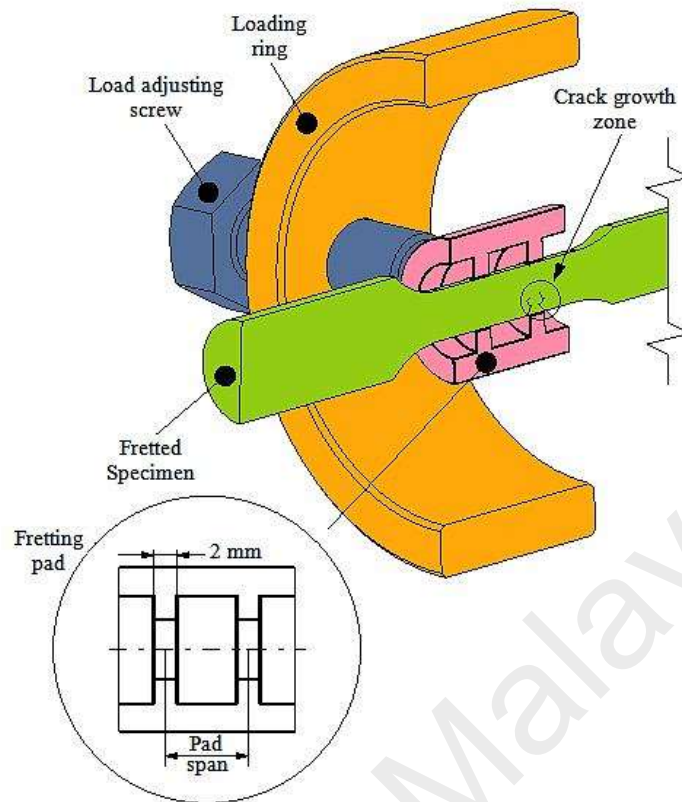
Assembly of fretted specimen with rotating bending fretting fatigue machine
